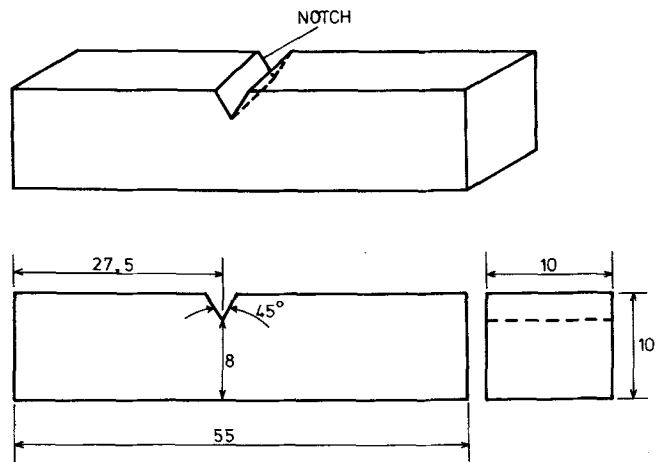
Charpy impact test specimen (all dimensions are in mm)
